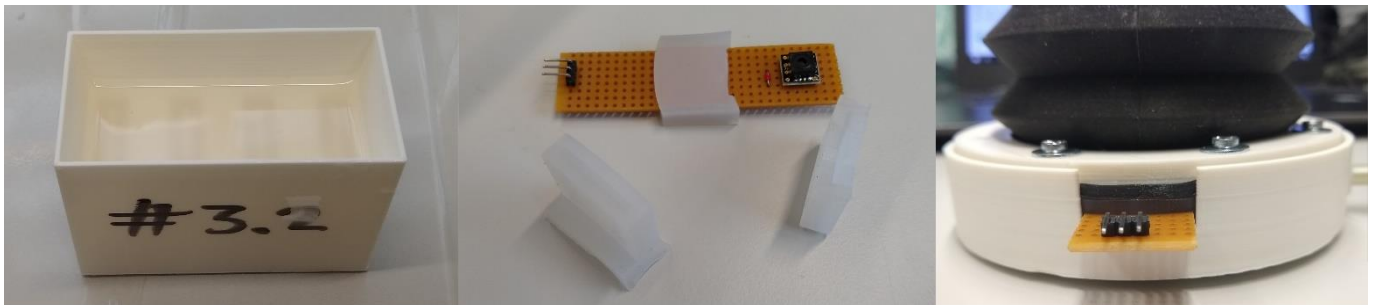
Mold of PCB enclosures; PCB enclosure fitted around a piece of PCB board; PCB enclosure assembled in module
